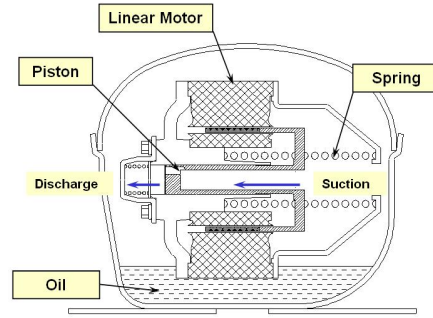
A cross-section view of a linear compressor for refrigerators.
